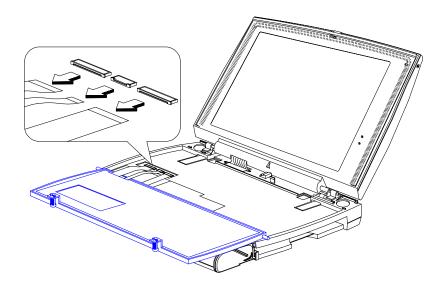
Unplugging the Keyboard Connectors and Removing the Keyboard
